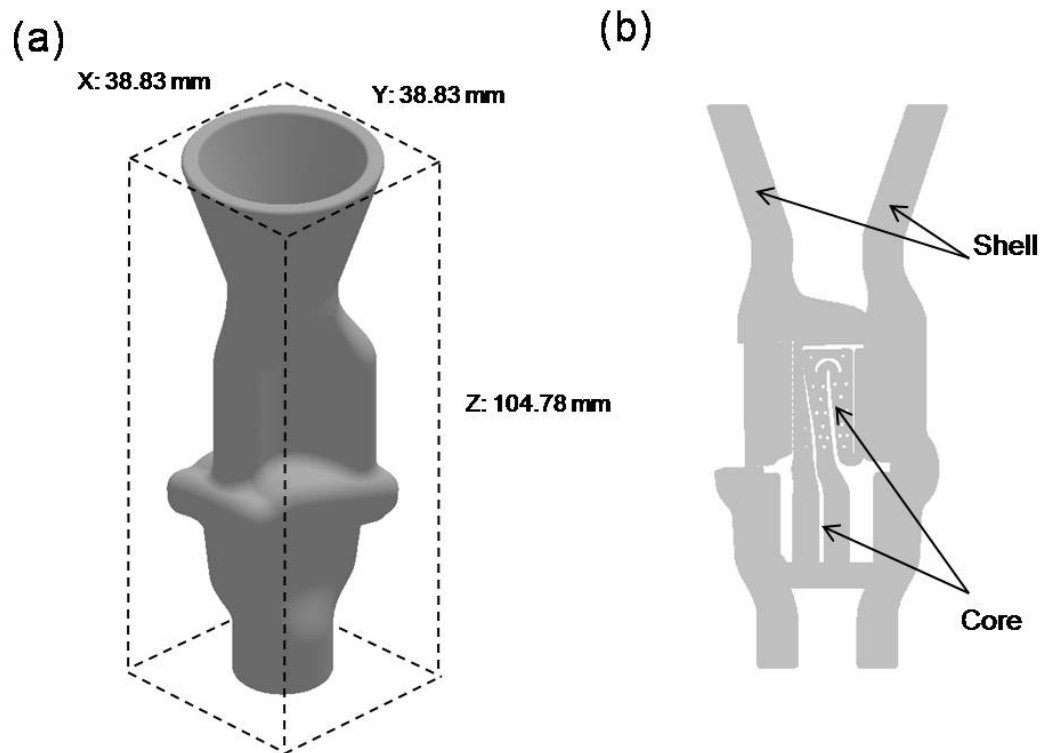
5 Integrally cored ceramic mold (ICCM); (a) the size of ICCM and (b) the cross section of ICCM showing core and shell parts.
